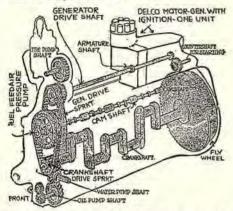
Note the silent chain of the engine front-end drive from crank shaft to cam shaft and generator shaft. In the later models of the Cadillac the distributor is not mounted on the generator housing, as shown, but is mounted behind the fan housing.
